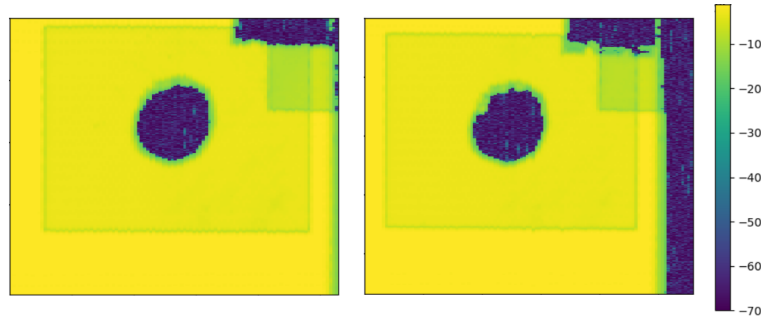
C-scans of specimen WF-300N-3.5sec. Left: before welding. Right: after welding
